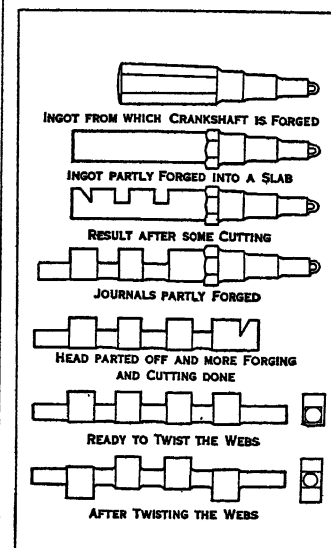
SOME OF THE MANY STAGES IN THE FORGING OF A 10-TON CRANKSHAFT BY 1,200-TON HYDRAULIC PRESS
